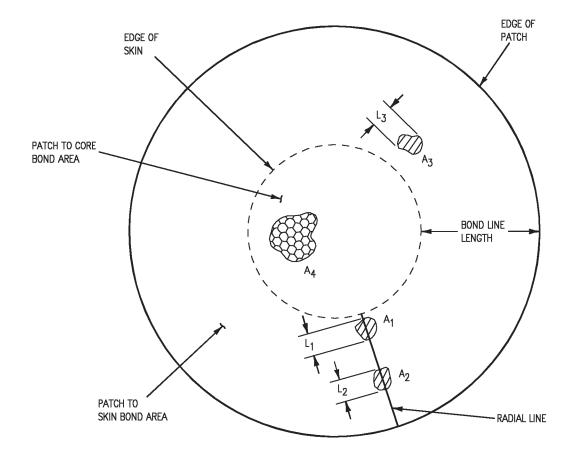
Typical Inspection on Honeycomb Core Sandwich Assemblies
